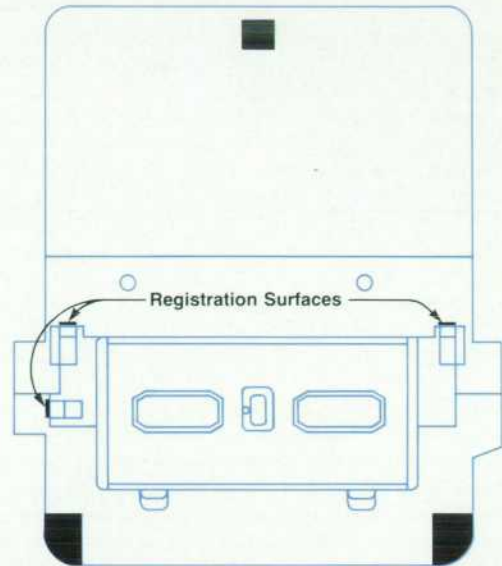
The printhead has to be aligned with molded features on the pen body, shown in black on this drawing.
